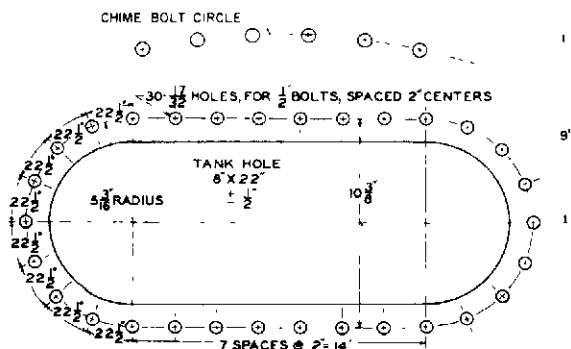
Bolting Pattern for 8-In. x 22-In. Oblong Thief Hatches, Pressure-Relief, and Vacuum-Relief Valves
